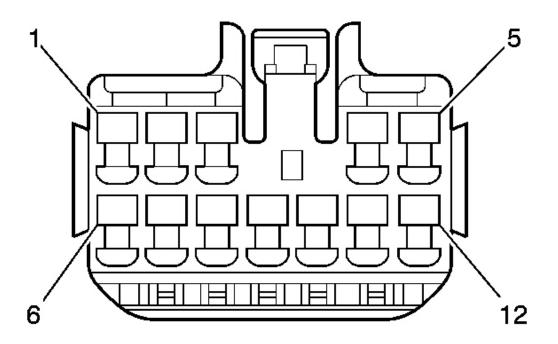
Passenger Door Lock and Window Switch Connector End View Courtesy of GENERAL MOTORS CORP.
